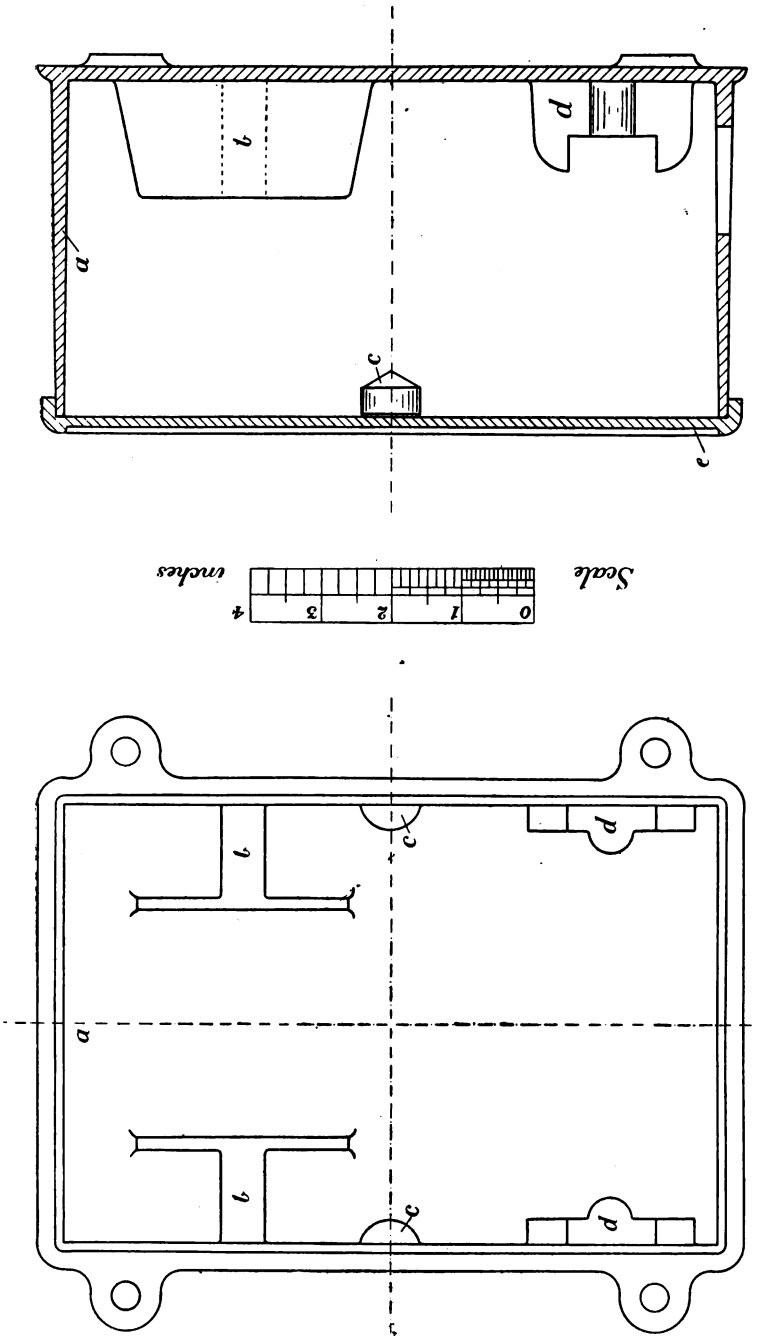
WORKINGS DRAWINGS OF IRON CASE FOR COMPLETELY INCLUDING THE AUTO-TRANSFORMER.
